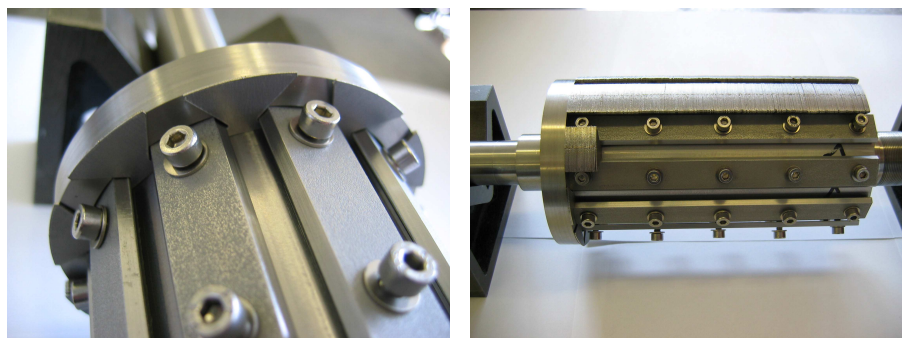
Construction of the segmented rotor of the prototype 6-phase 12-10 SR machine
